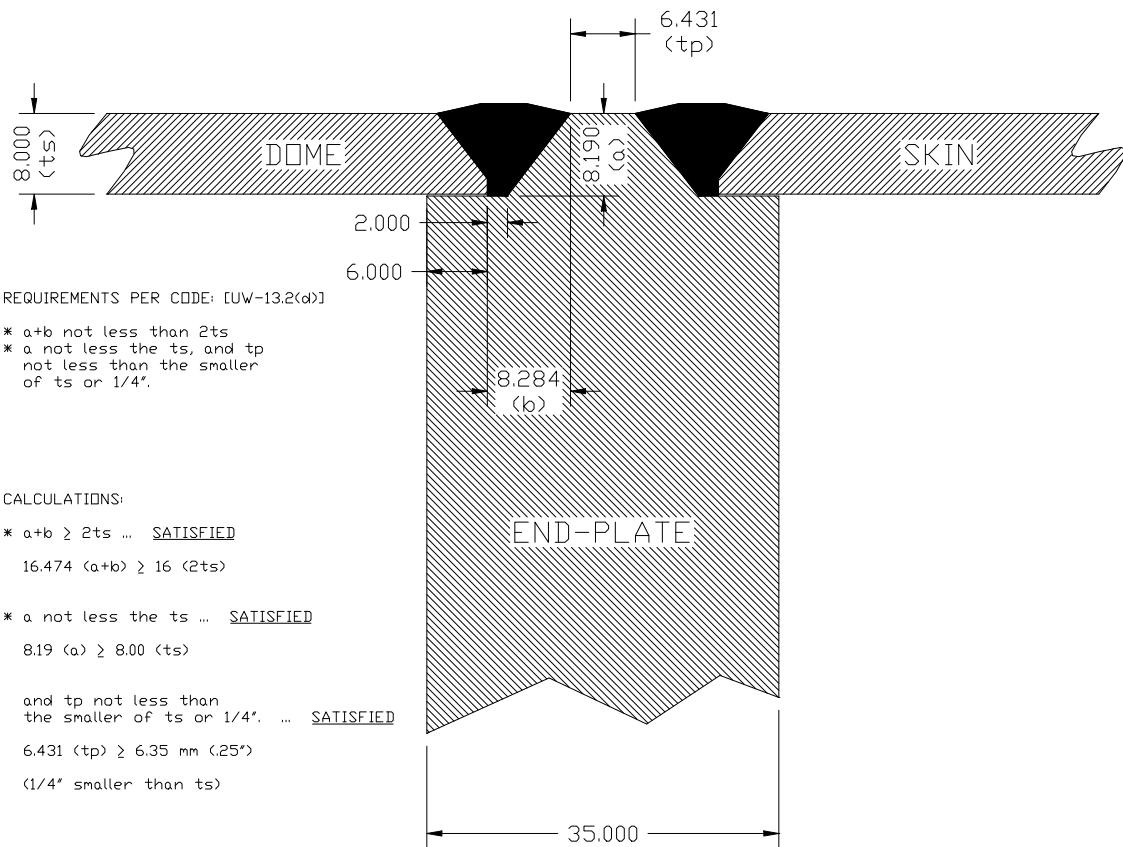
Detail of cold mass skin to end plate weld.
